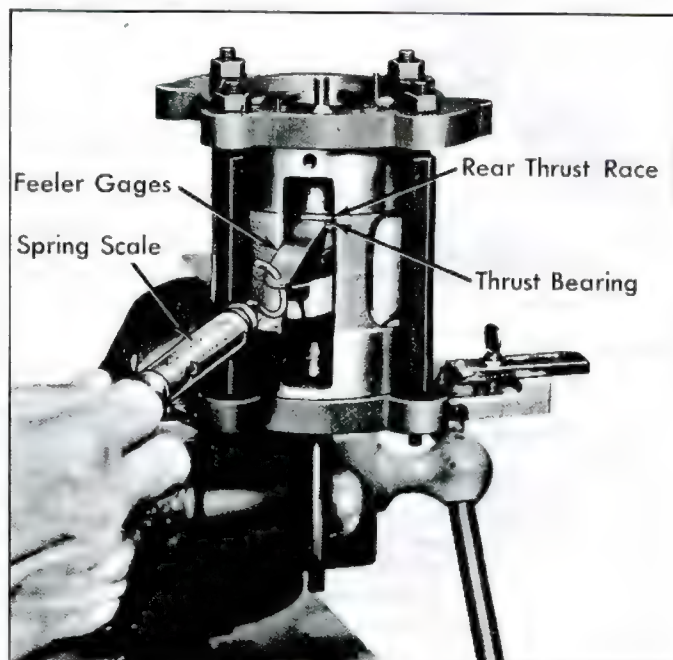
Checking Clearance Between Rear Thrust Bearing and Outer Thrust Race
